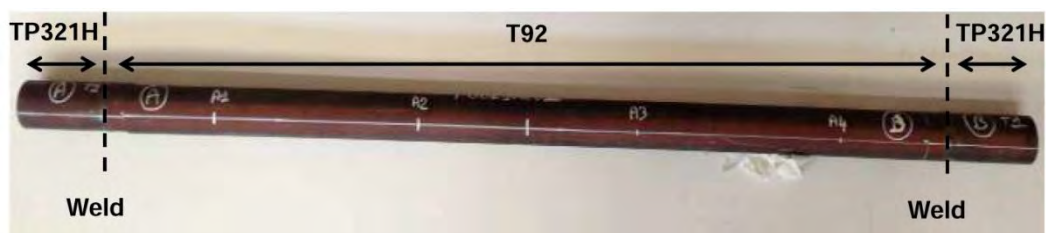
T92 tube welded to TP321H stainless steel tubes after power plant operation.
